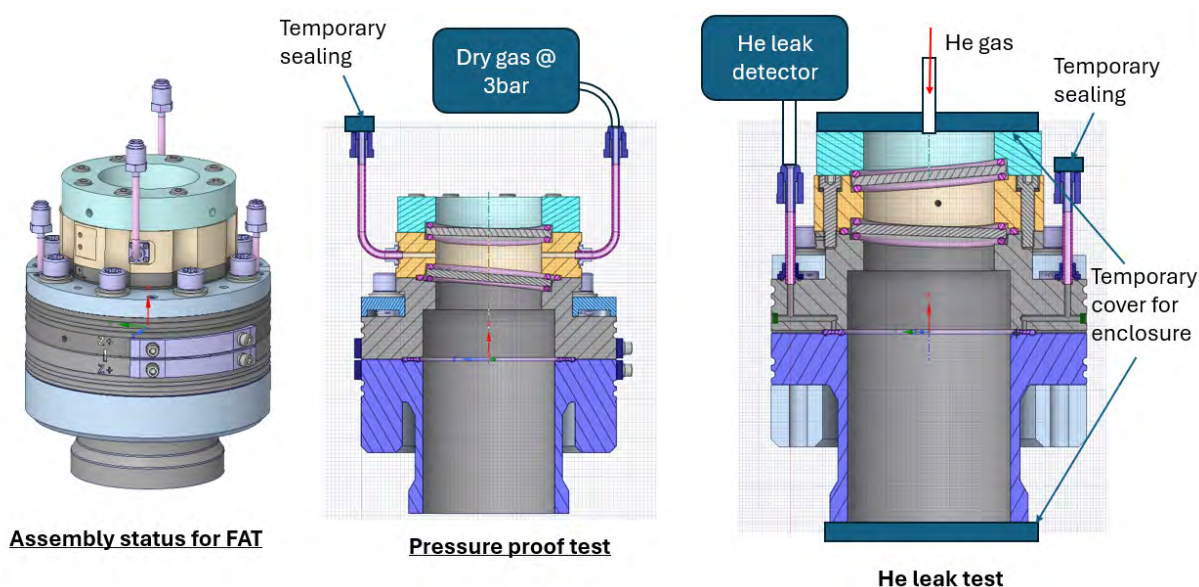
Test configuration for FAT of the double Helicoflex sealing between the mating flange and the window assembly
